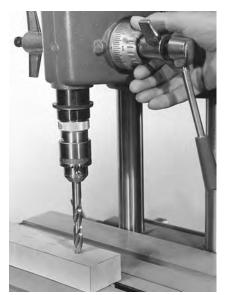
Extend the quill until the cutting flutes of the bit just touch the workpiece.
